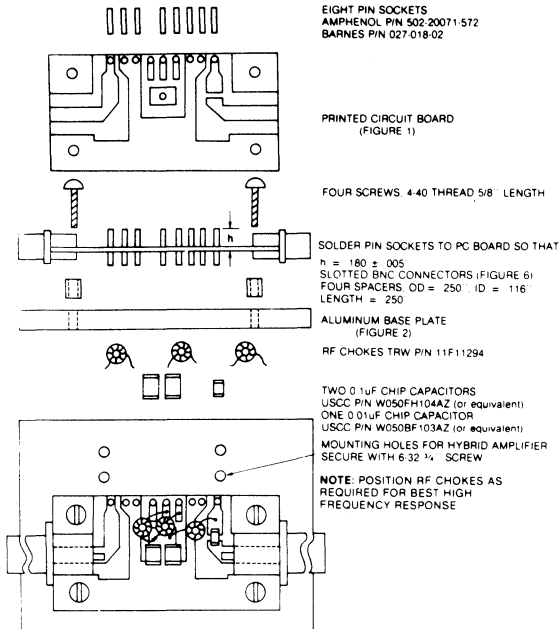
CA2820 Test Fixture Assembly (Case 714F-01)
